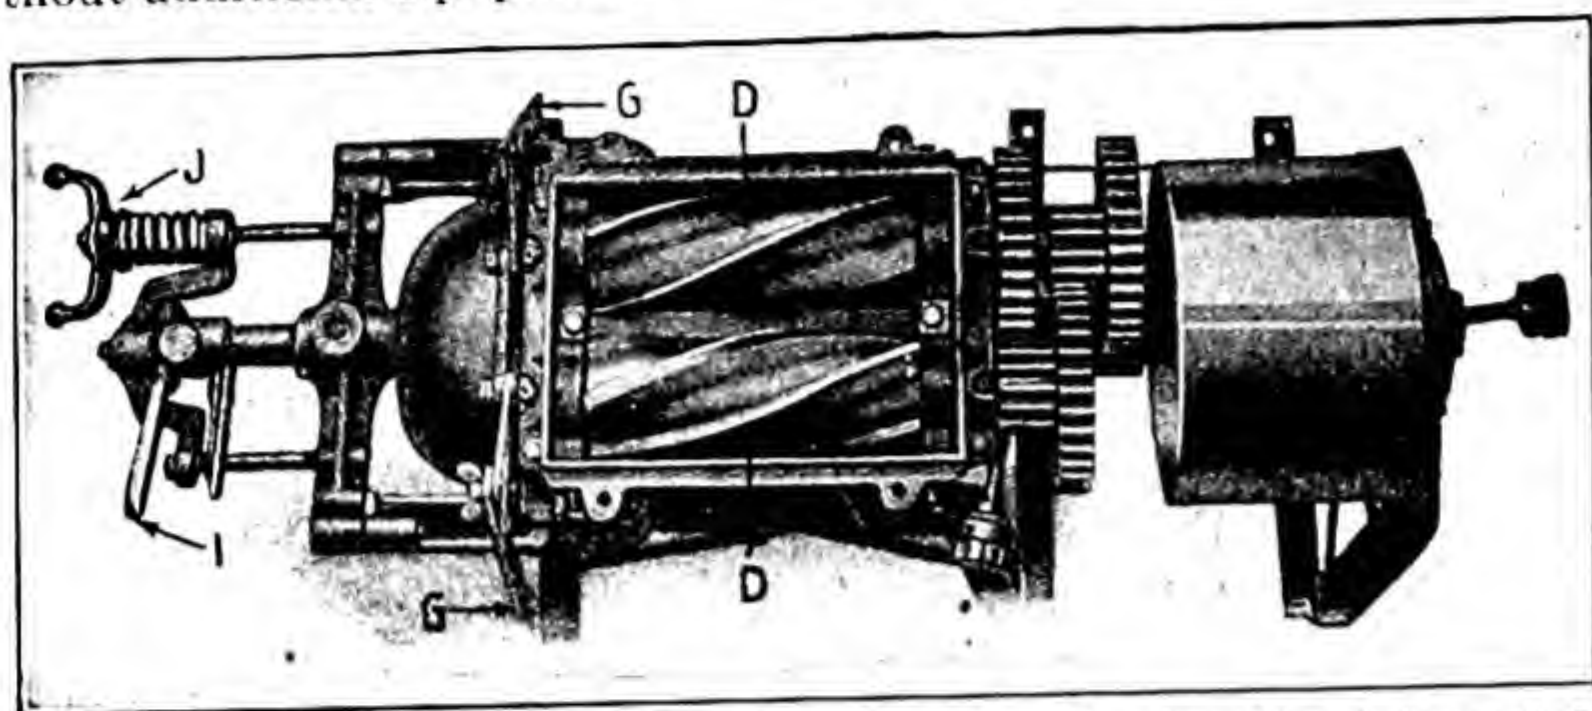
Grinding mechanism of Type-D feed grinder: *D*, cob-cutting knives; *G*, feed-regulating slides; *I*, plate-release lever; *J*, plate-adjusting crank.
